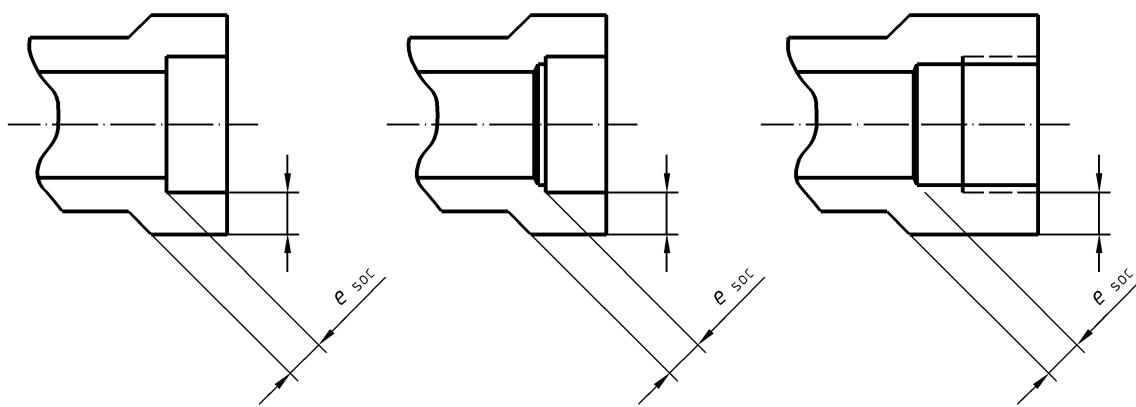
Wall thickness, e_{soc} , for socket welding and threaded ends
